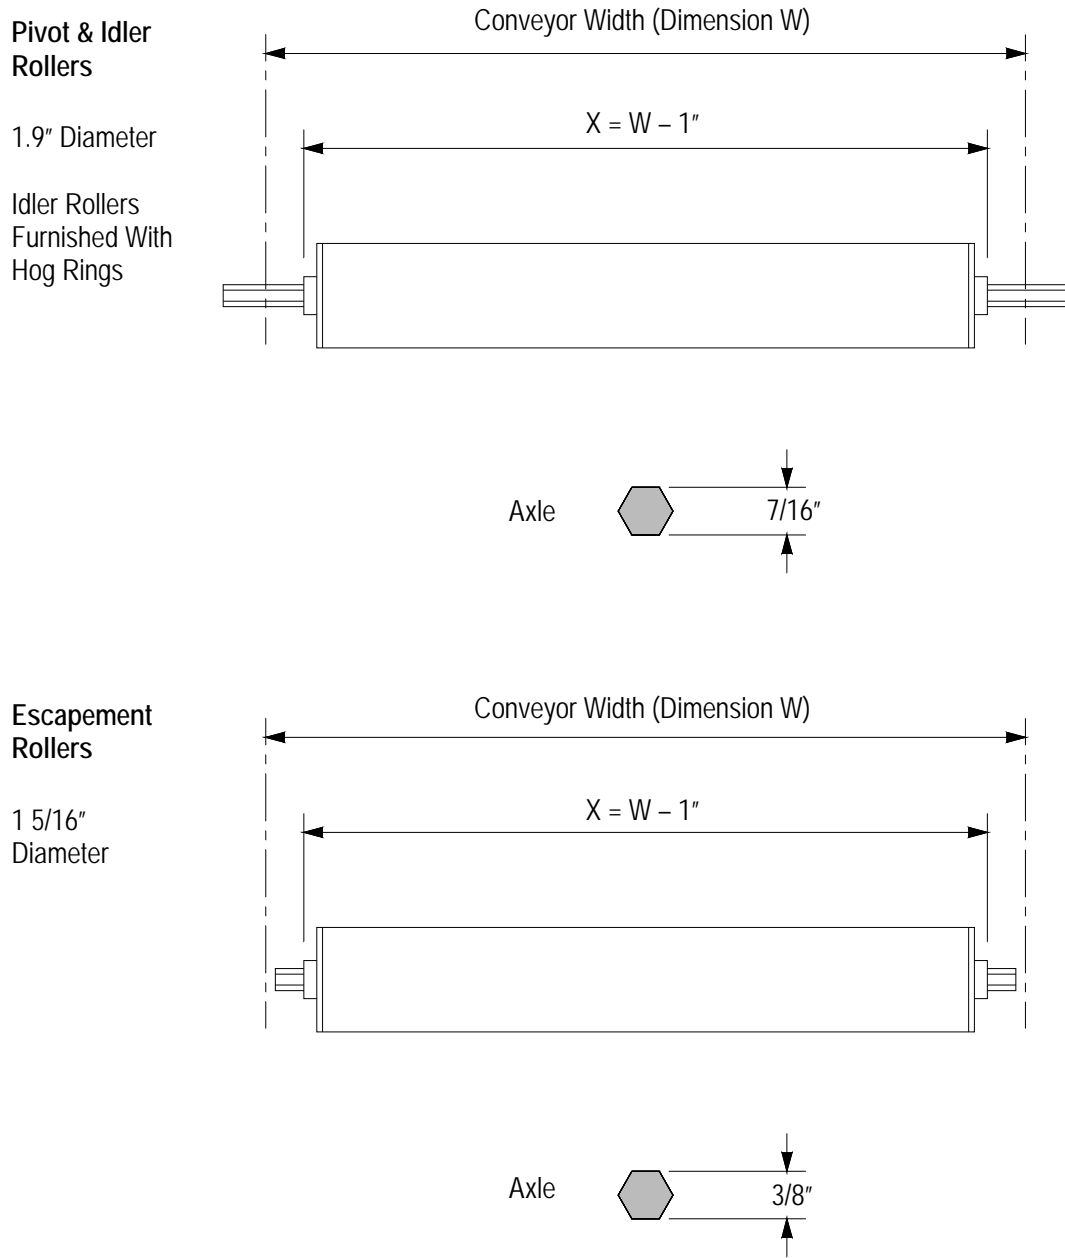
Roller & Axle Size – 2" & 4" Roller Centers
